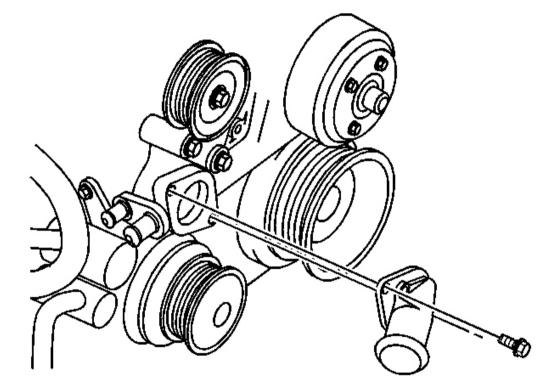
Water Pump Inlet & Thermostat Housing Courtesy of GENERAL MOTORS CORP.
